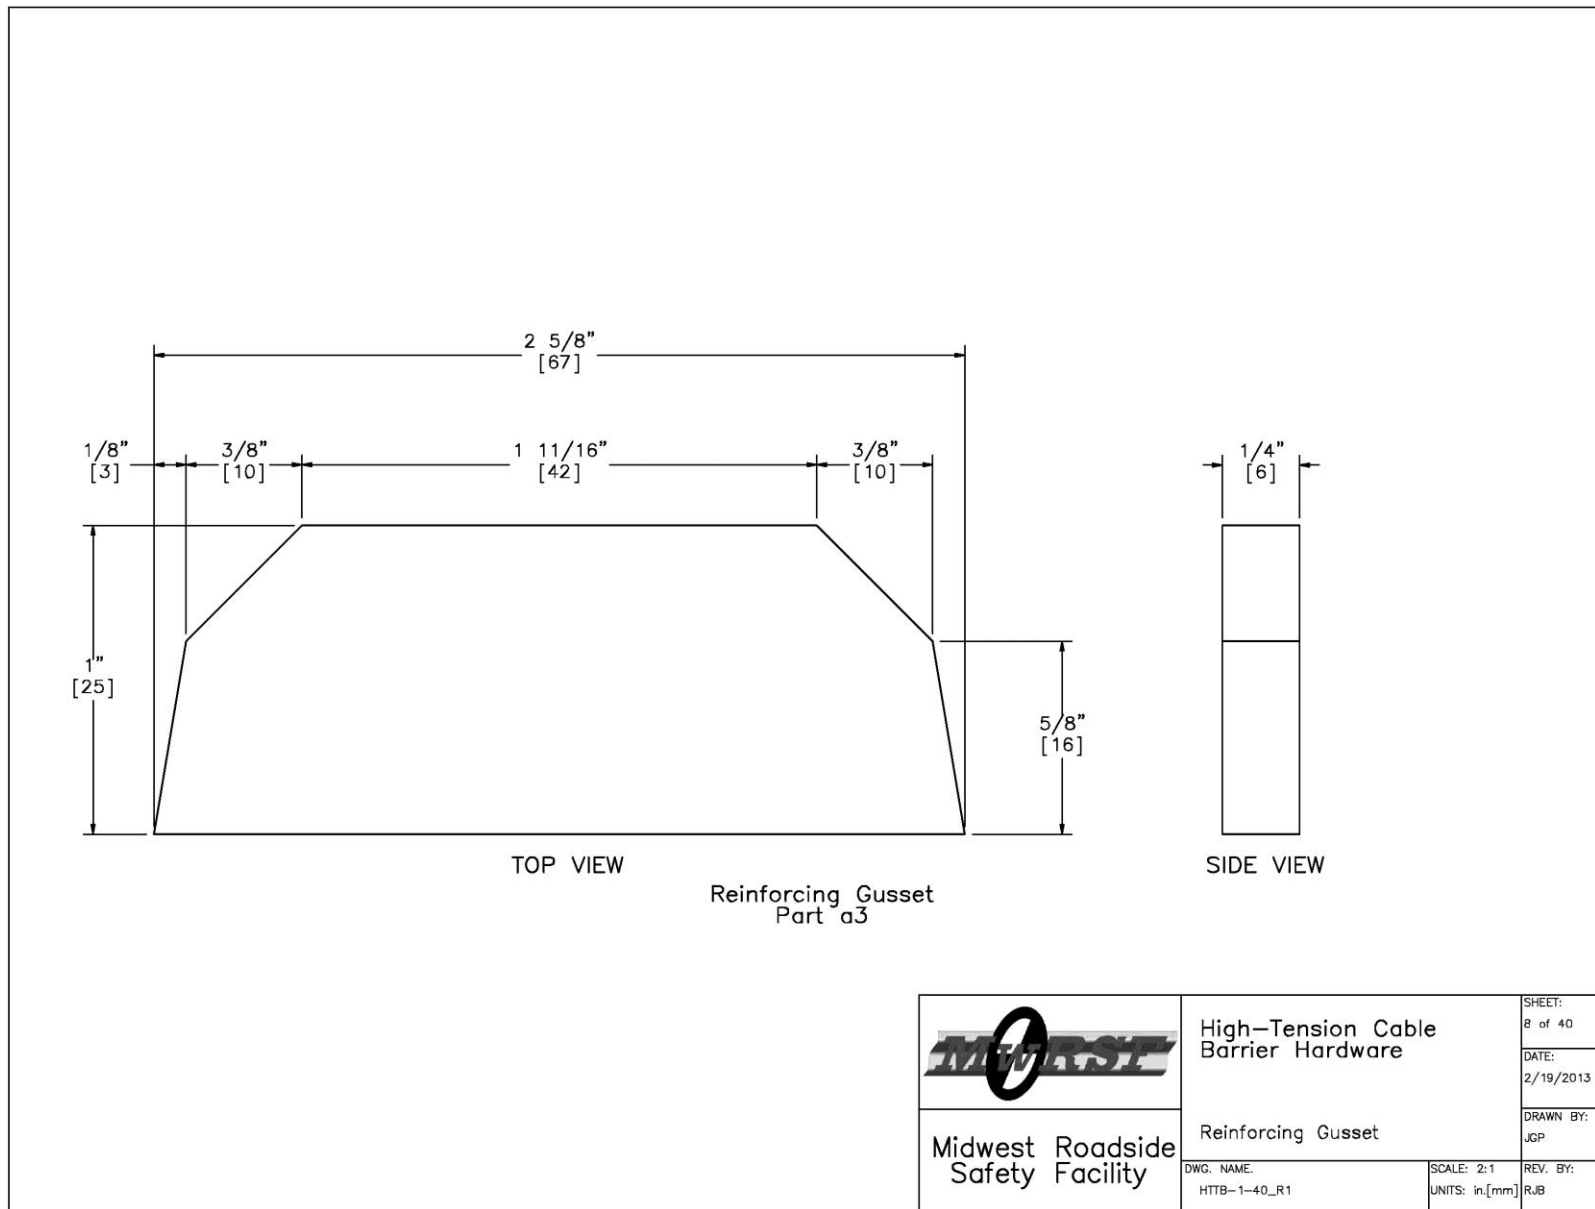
Reinforcing Gusset Details, Test Nos. HTTB-1 through HTTB-40
